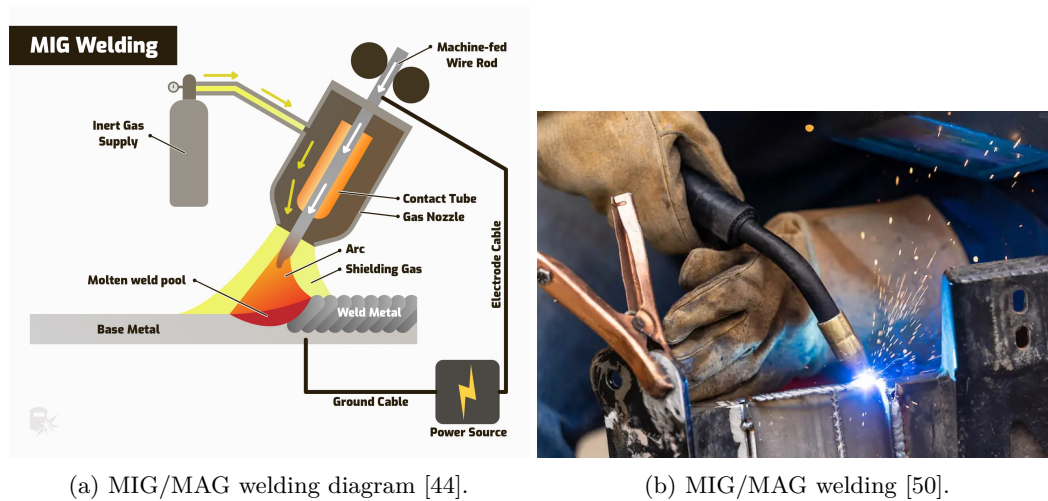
Gas Metal Arc Welding is a welding process that uses a continuous solid wire electrode and an inert (MIG) or an active (MAG) shielding gas to protect the weld pool [44, 48].
